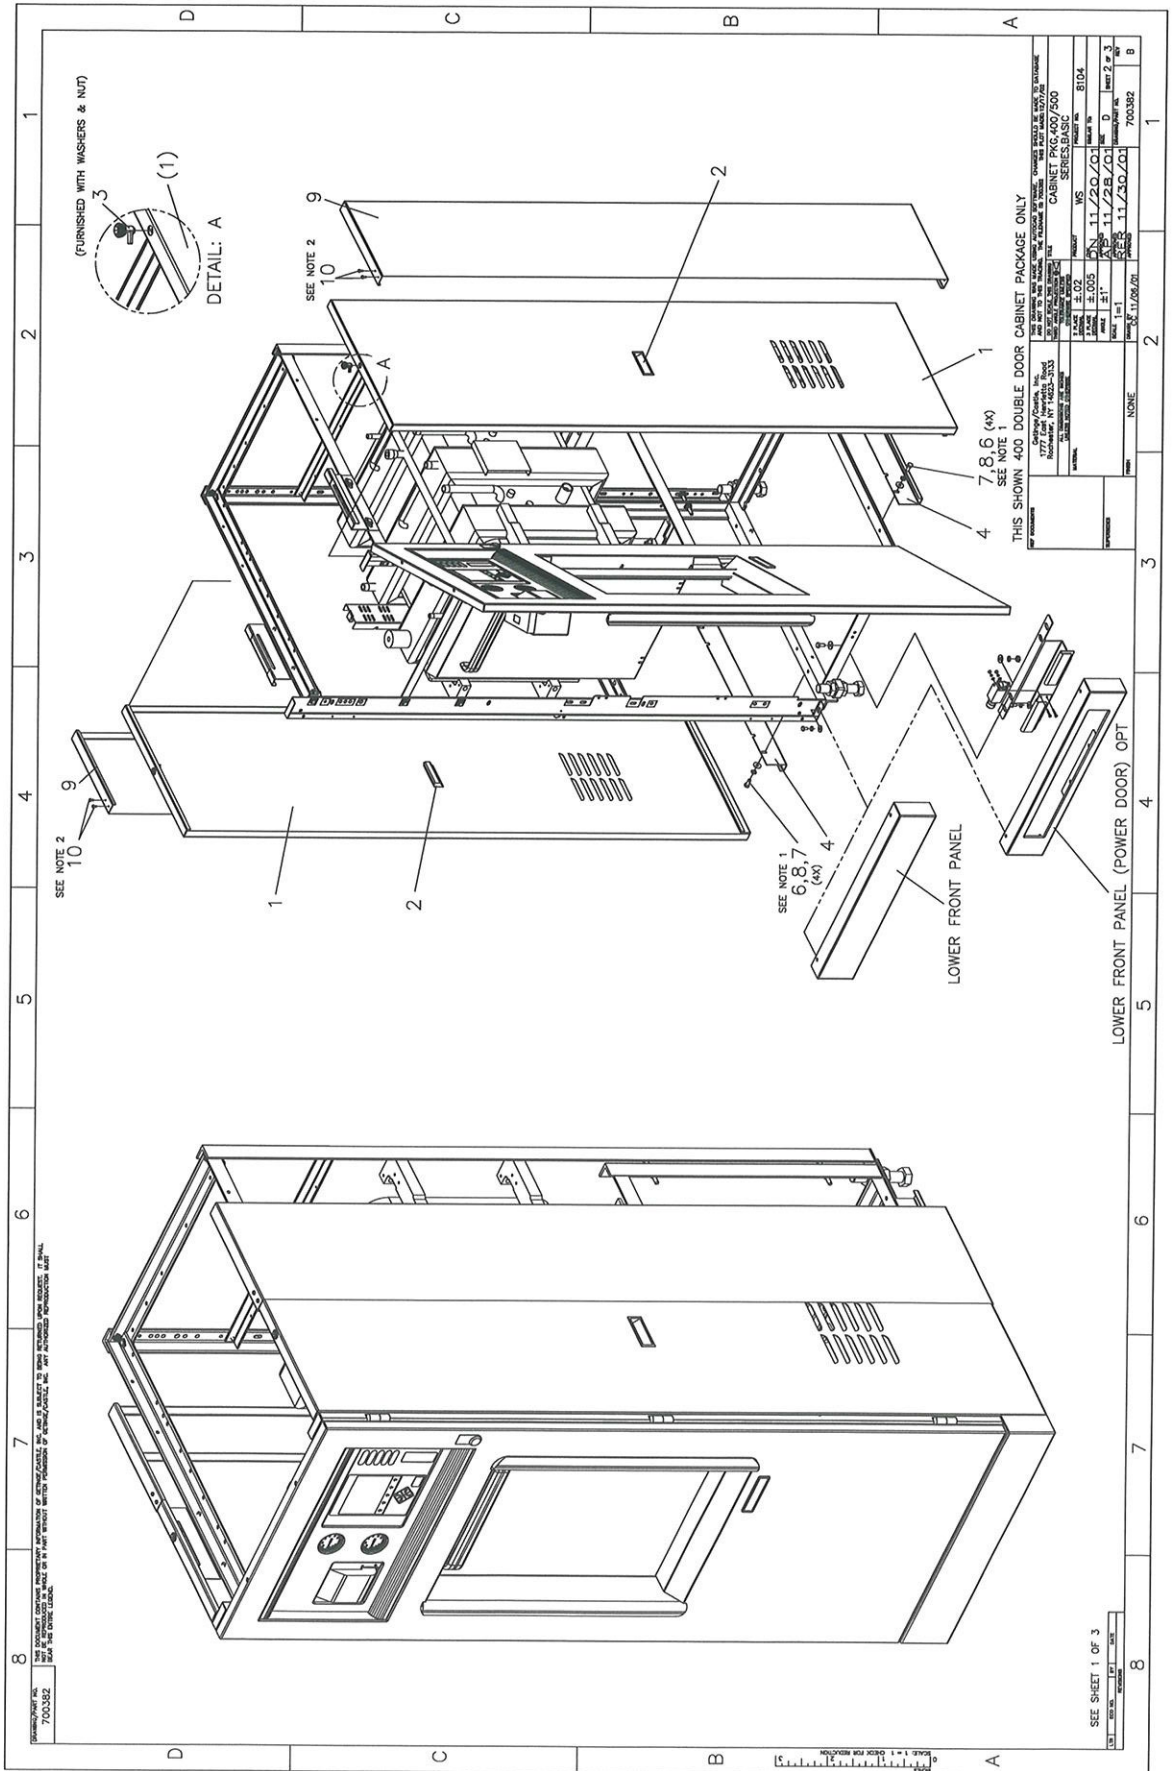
, SHEET 3. BASIC CABINET PACKAGE
